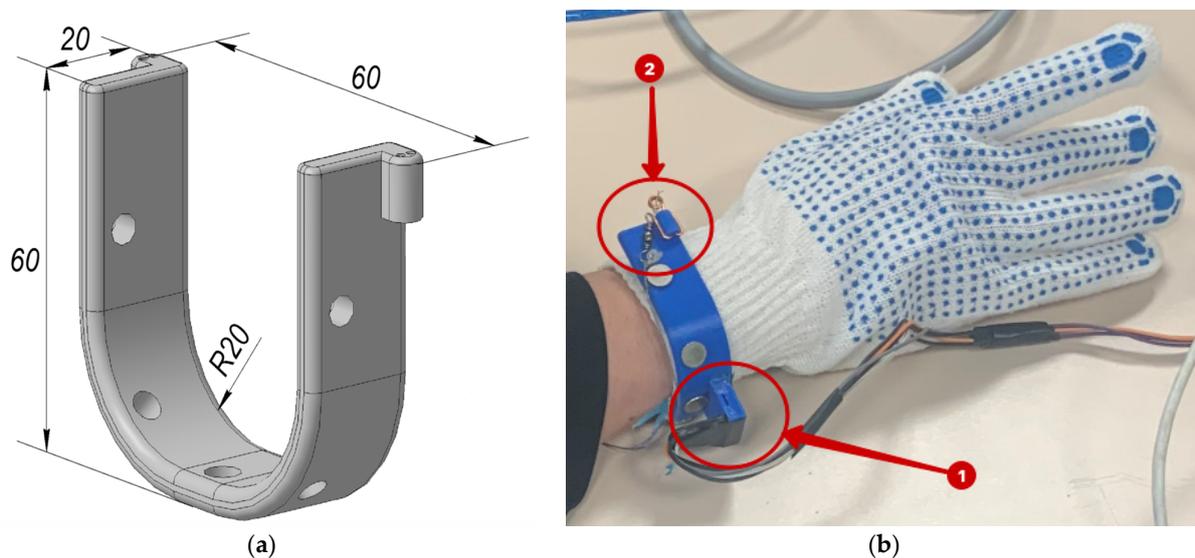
Wrist ring platform of L-CADEL v.3 prototype: (a) a CAD model with sizes in mm and (b) the built prototype installed on a user's wrist. (1 is an IMU sensor; 2 is a cable connection hook).
